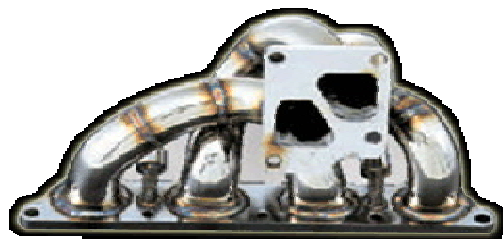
Welded tubular manifold with a divided turbine inlet design feature
